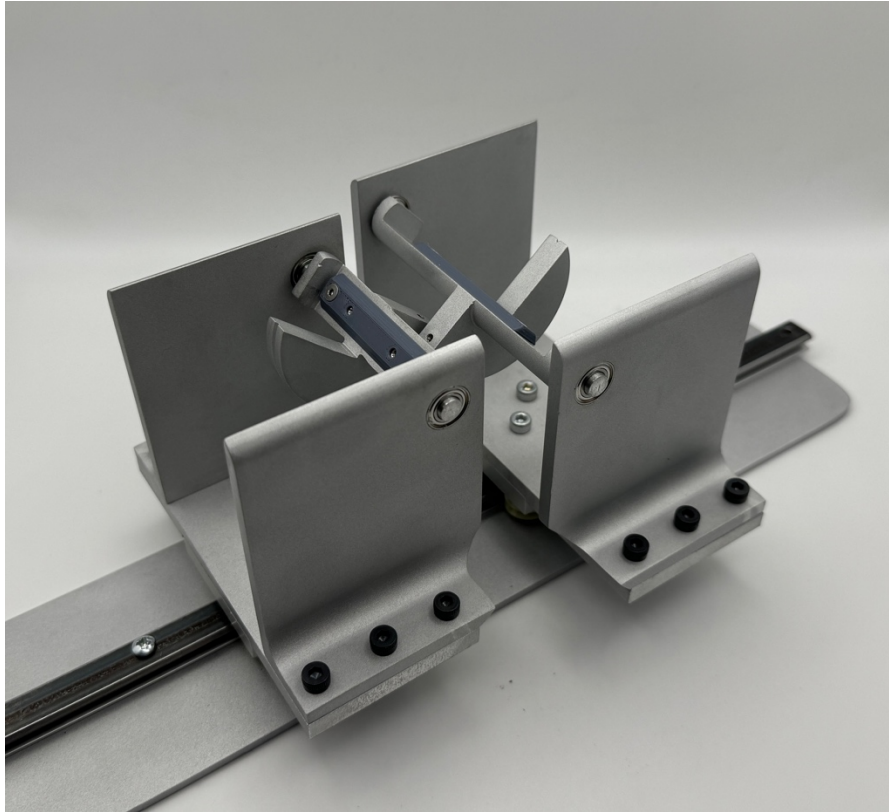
Final assembled product to be mounted in a F505 Mark-10 static load frame.
